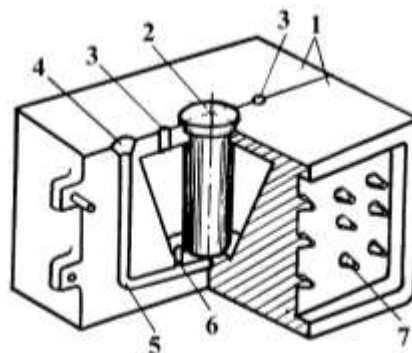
Metal (chill) mould: 1-half-moulds; 2-core; 3-gas relief sprue; 4-pouring basin; 5-downgate; 6-ingate (runner); 7-dowels for high-rate heat removal
